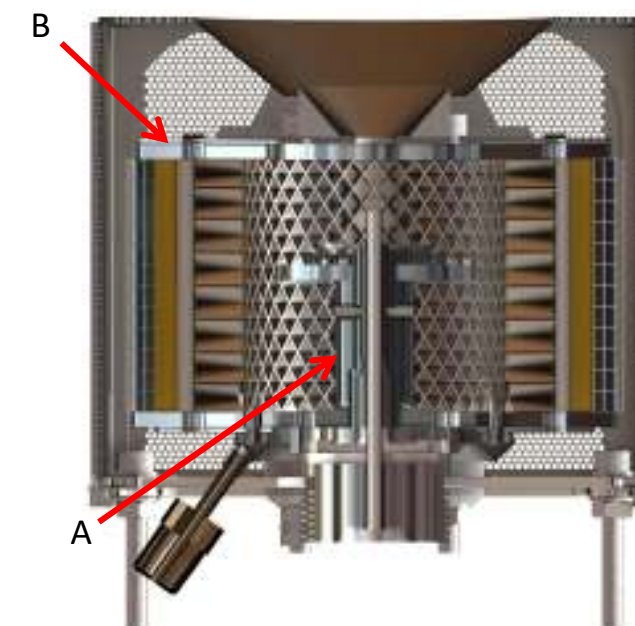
Cutaway view showing the main yoke (A) and the ring yoke (B)
